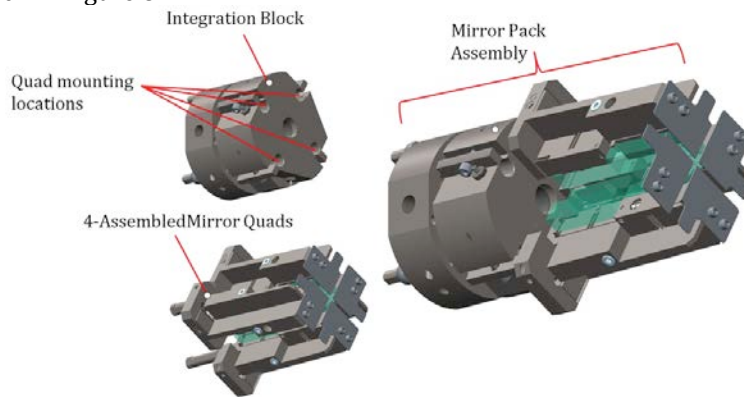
All four channels of the KBO assembled with optics and aligned to the integration block using CMM. One quad has been removed from the right hand image for clarity.
